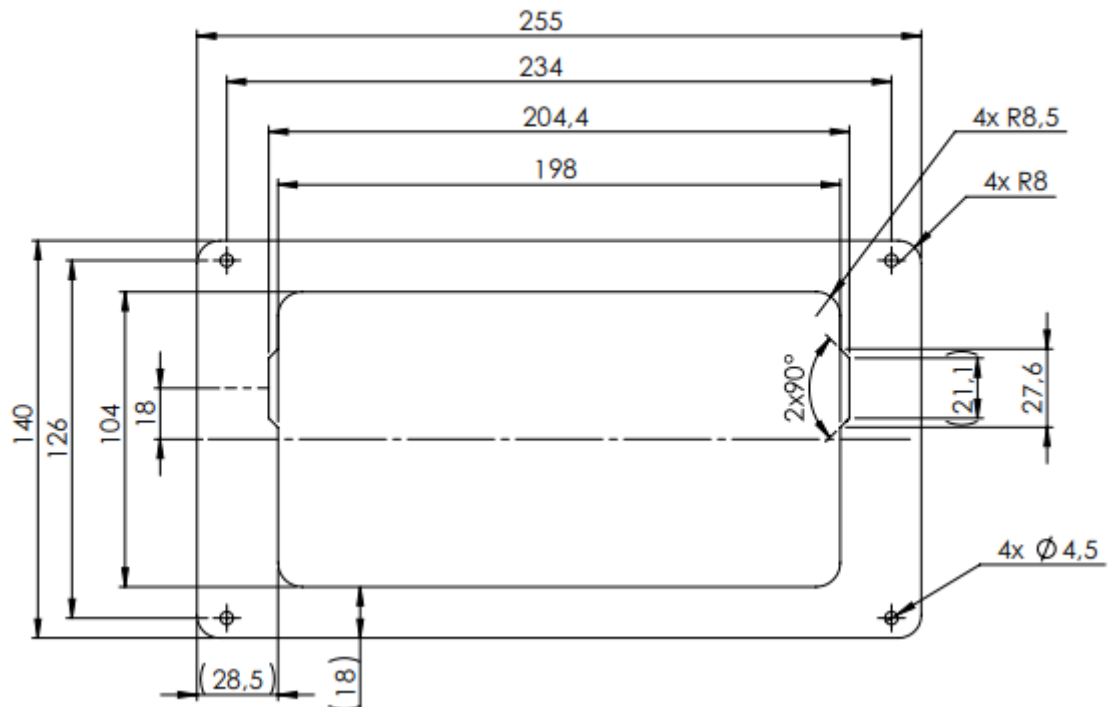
R6 CDU, Mounting frame dimensions [mm]
